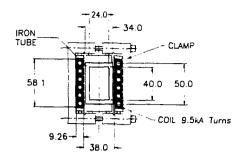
Design of test channel with iron core and compensating coils to test computer modelling of MC3. Dimensions are in millimeters.
